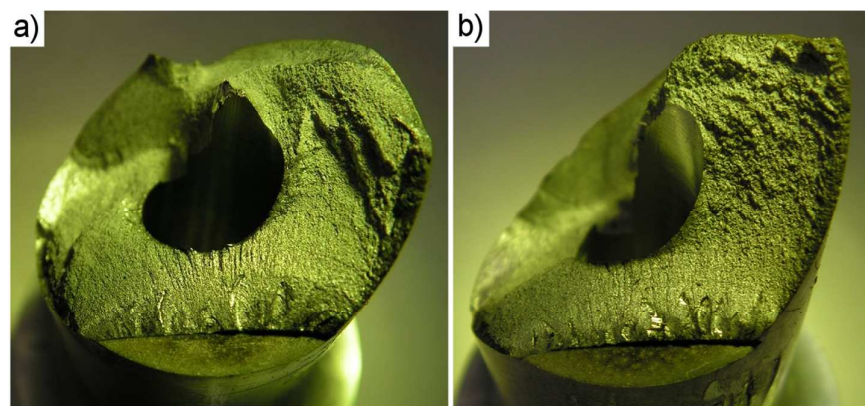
Crack surface of specimens undergoing axial/torsion combined load: B95AT alloy a); D16T alloy b).
